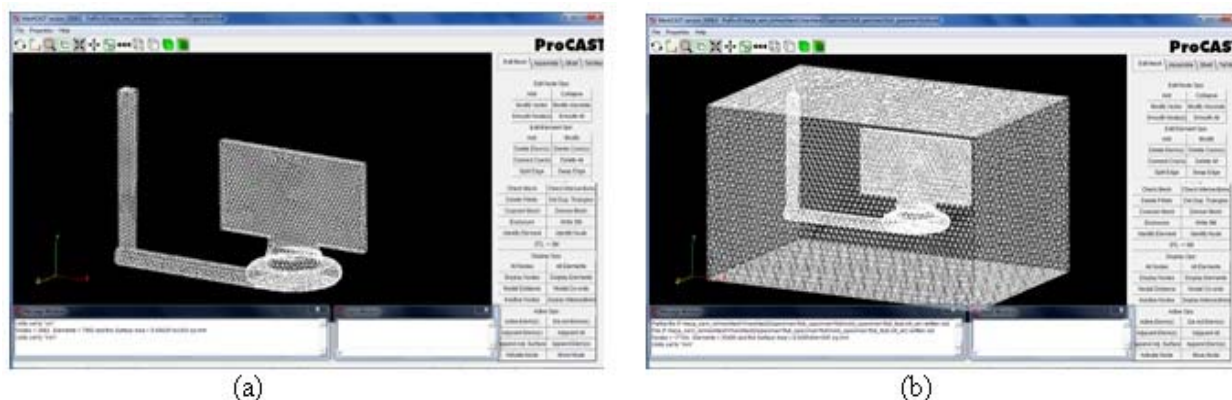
(a) The meshed model of the casting, (b) Assembled mesh model of casting and mould.
